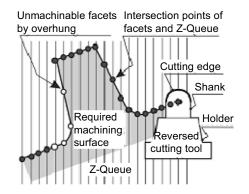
Generation of machining points on Z-Queue, and model of cutting tool
